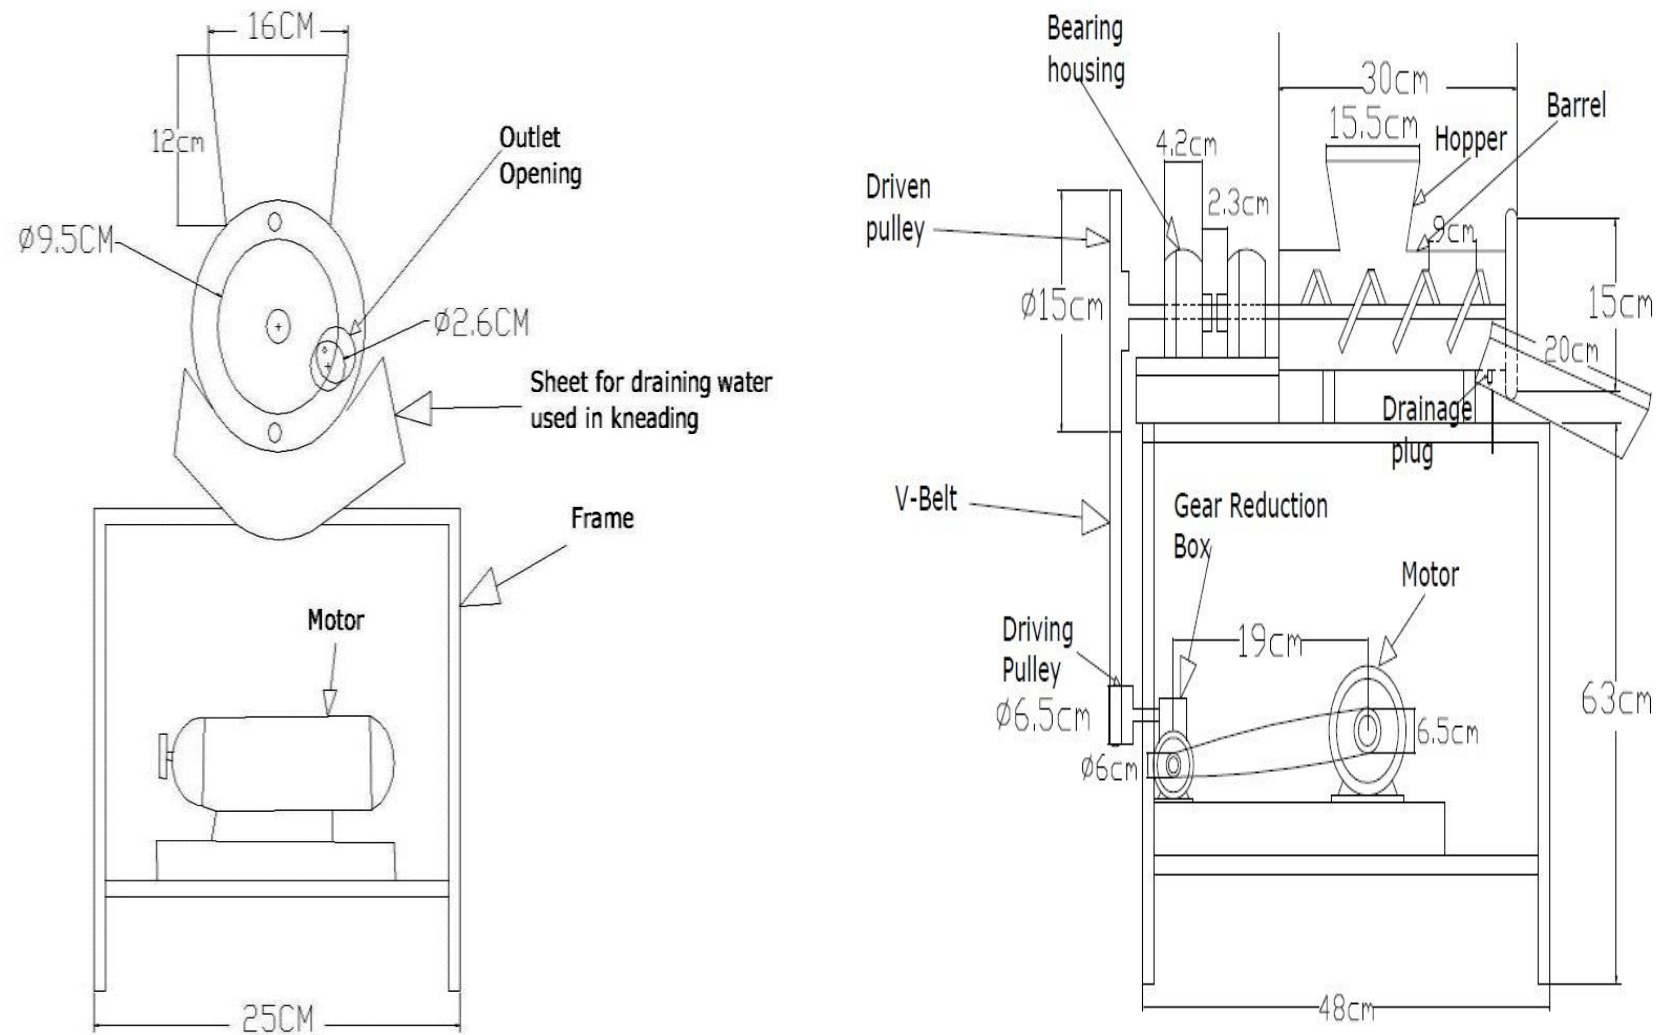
Schematic diagrams of the unit with Front View (left) and Side View (right)
